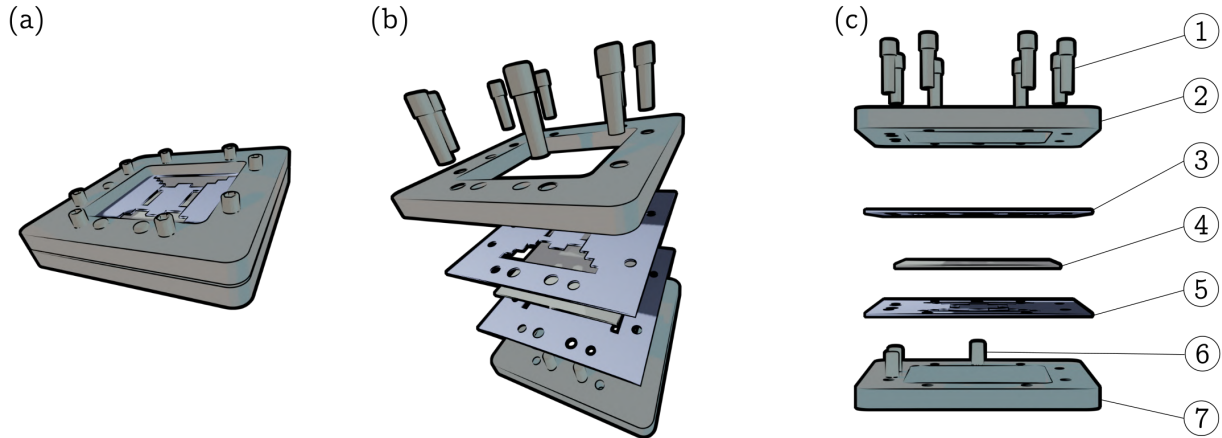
During treatment, the sample is placed in a steel jig: (a) A representation of the assembled jig; (b) a perspective representation of the disassembled jig; (c) a detailed representation of the disassembled jig. The cap screws (1) apply the clamping pressure to keep the sample from deforming during the treatment. The jig structure is comprised of a pair of steel frames (2 & 7). The jig further serves the purpose of holding and providing accurate registration of the laser cut cardstock masks that impose the peening pattern (3 & 5), as well as the registration of the sample (4), with the use of three steel dowel pins (6).
